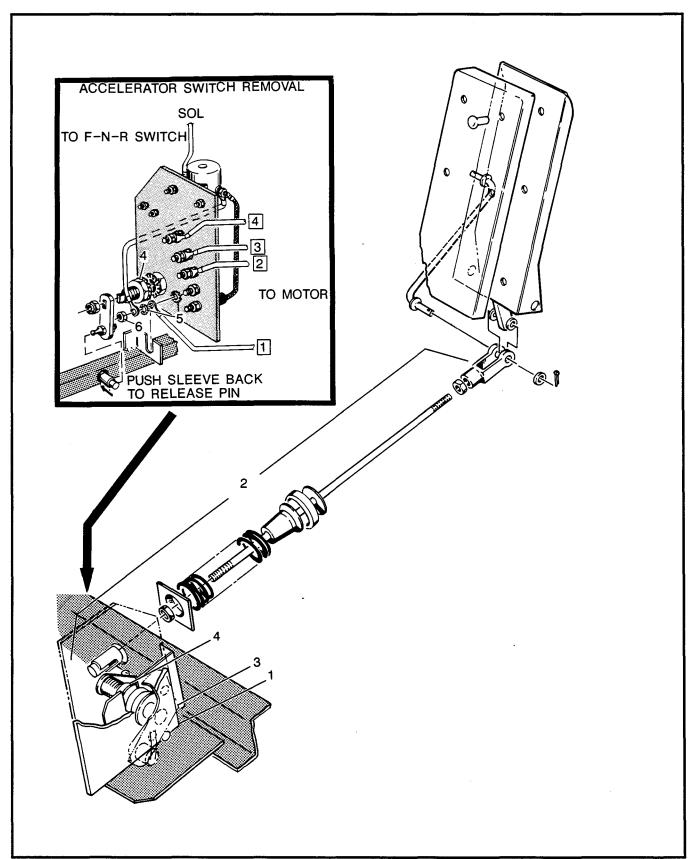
ACCELERATOR AND HILL BRAKE LINKAGE
